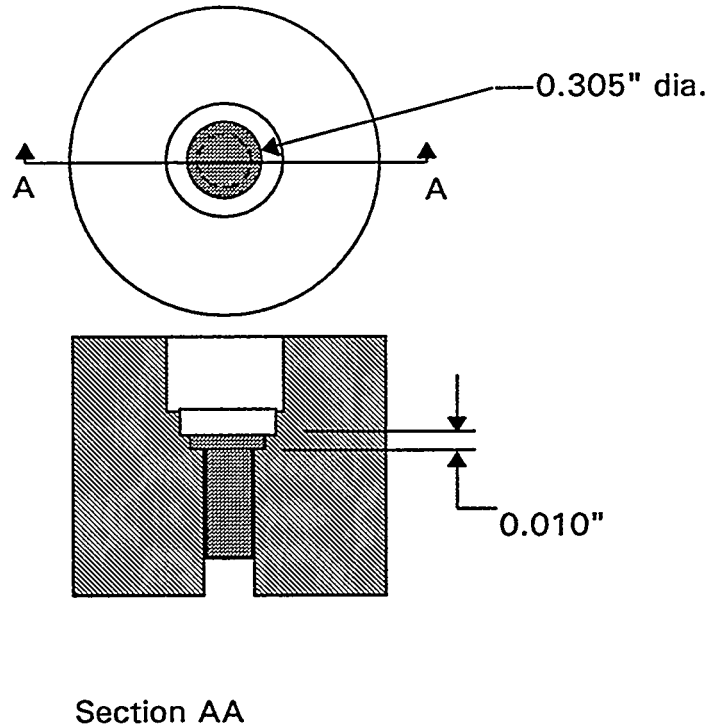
"CSD Plunger" to "Body A" weld.
